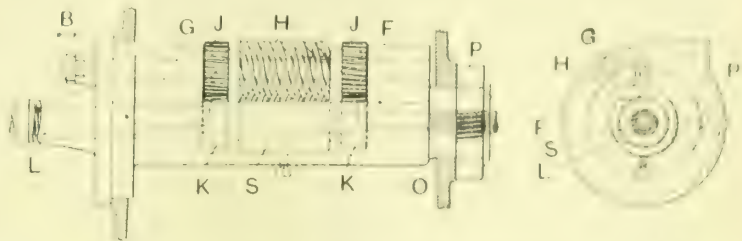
BROWN'S WORM WHEEL GENERATING MACHINE.
